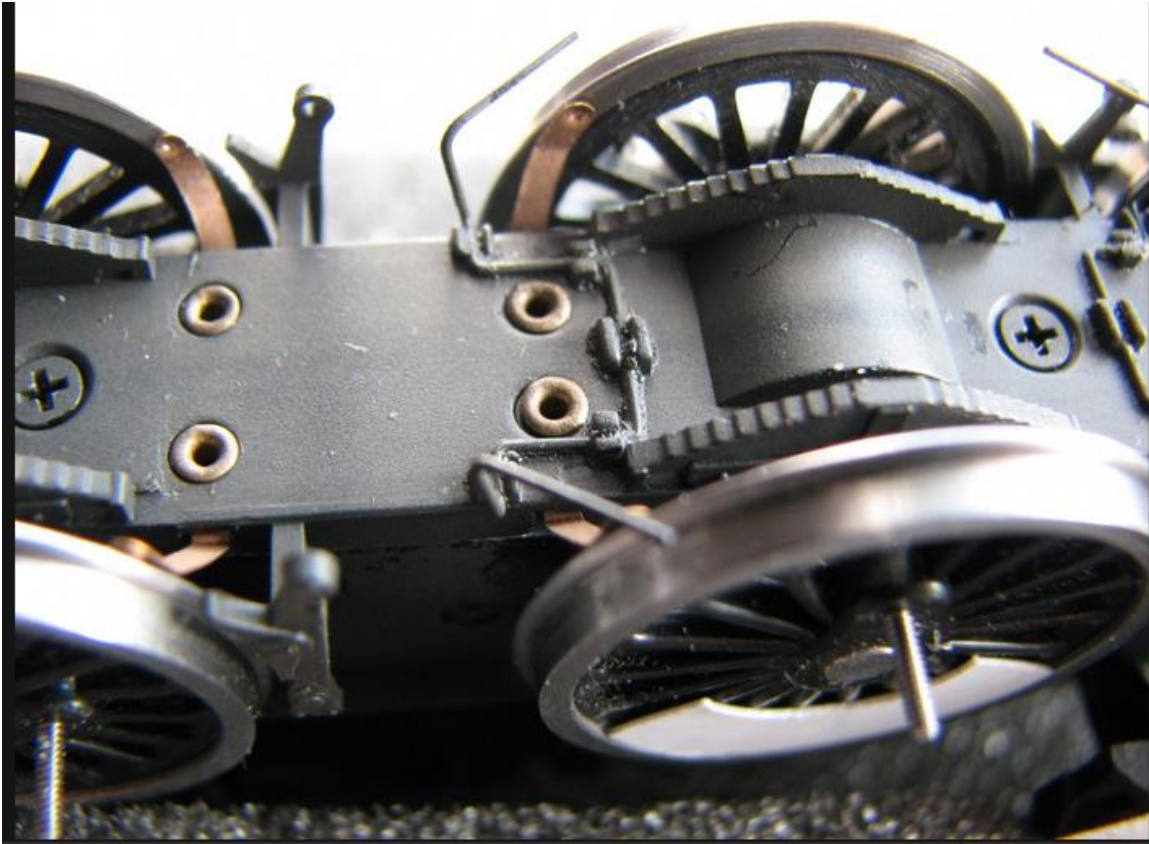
These will need slightly bending outwards to allow for the wider gauge, and the wire sand-pipes can be tweaked to line up with the wheels, just be gentle with them!
